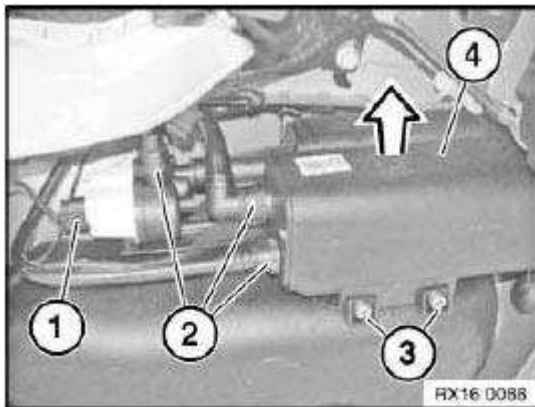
Plug Connection, Quick-Connect Couplings, Screws And Removal Direction
